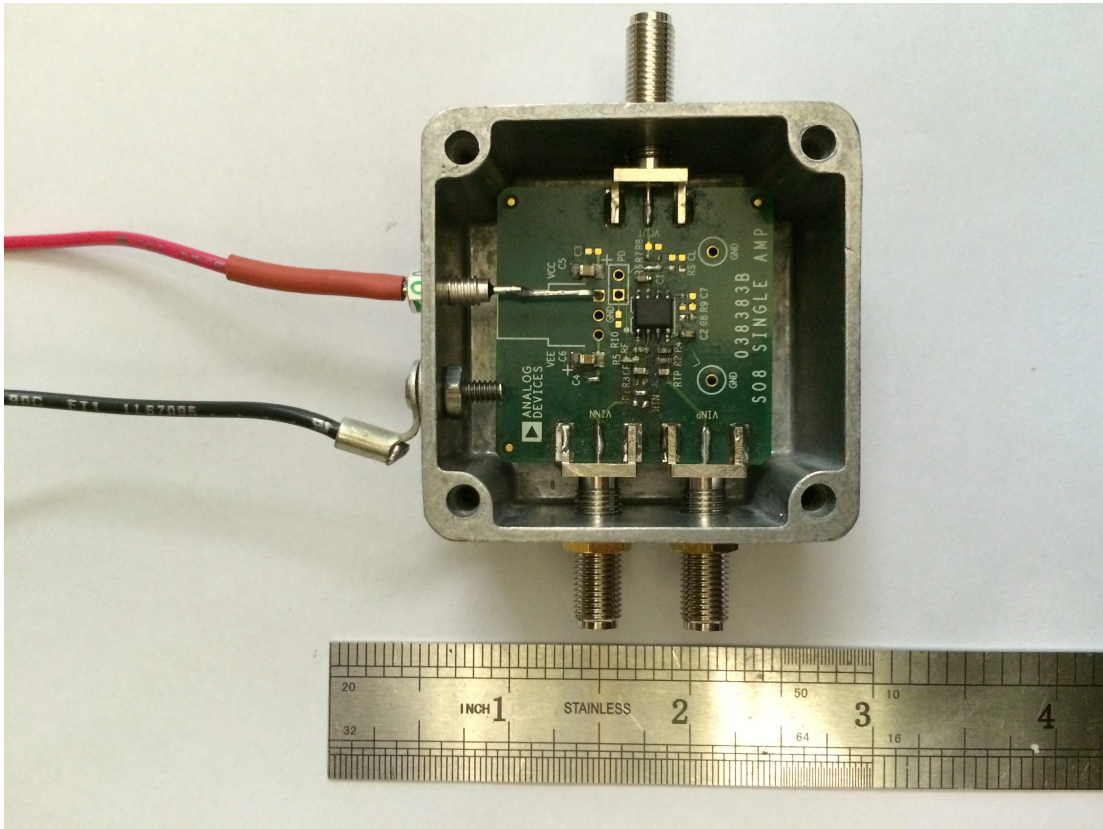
A picture indicating how the box is machined and the how the circuit is packaged
